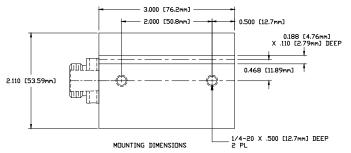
Mounting holes and keyway slot dimensions shown on the bottom of the headstock.
